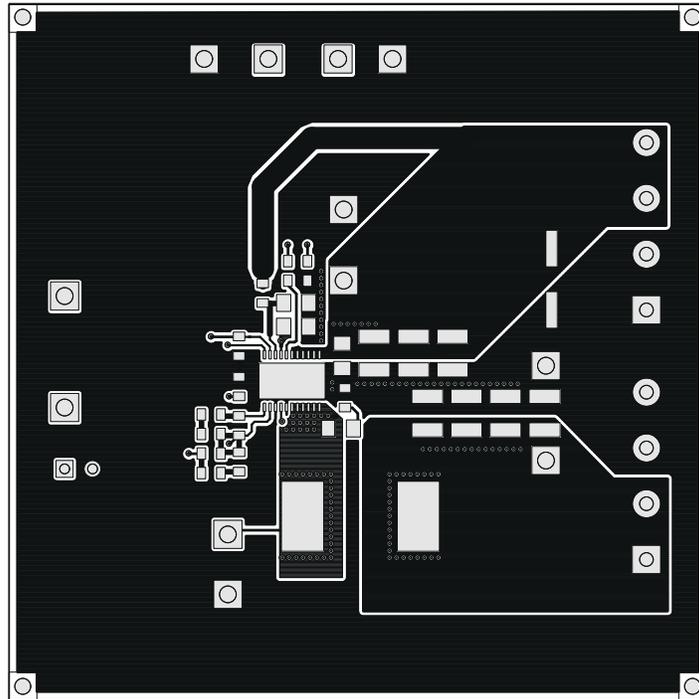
TPS56121EVM-601 Top Copper (top view)
